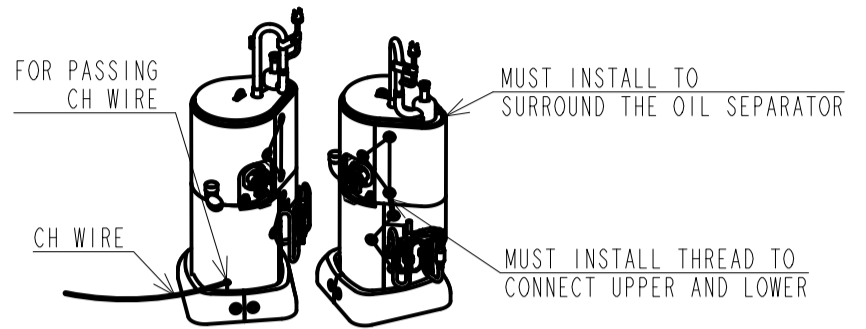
INSTALLATION DETAILS OF COMP-INSULATION
